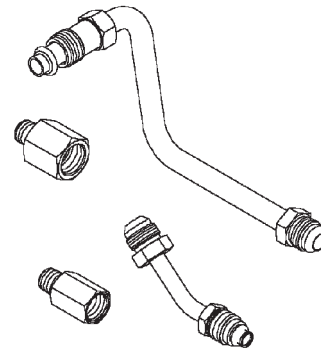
4.7L HYDRAULIC POWER STEERING TEST ADAPTERS
